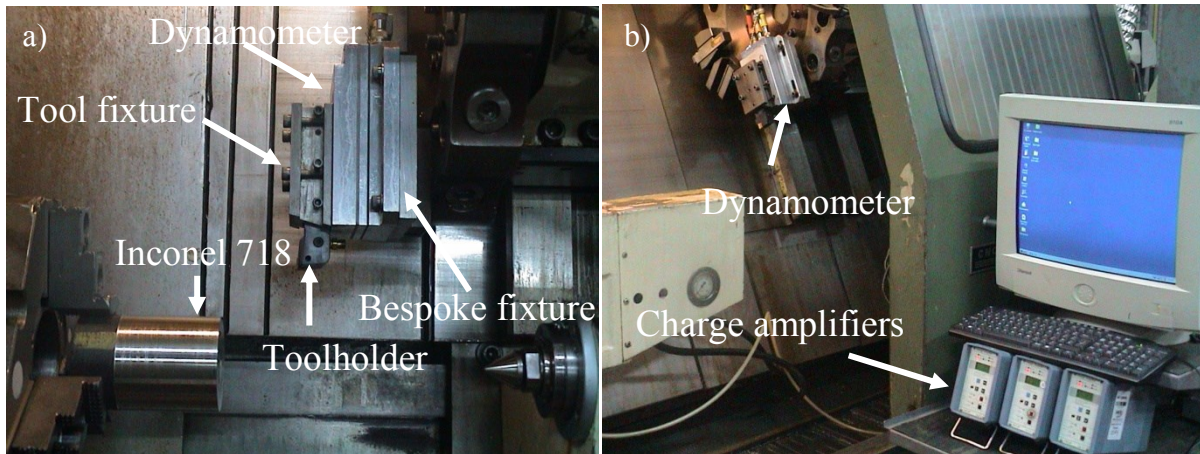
Dynamometer set up on lathe with (a) workpiece and (b) charge amplifiers
